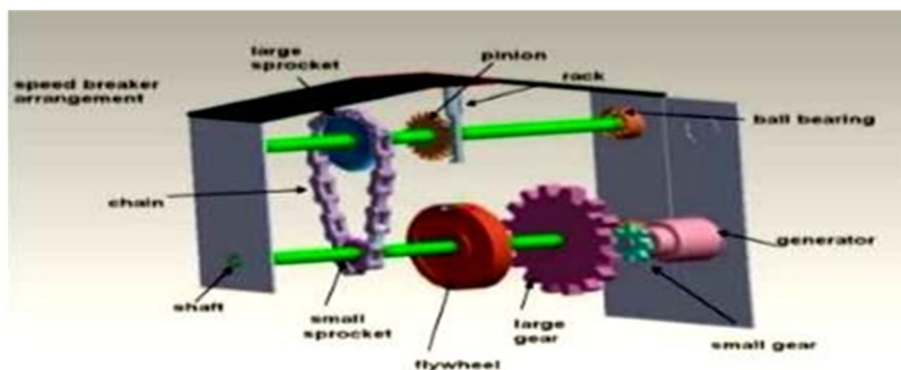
Rack And Pinion With Chain Drive Mechanism [1]
